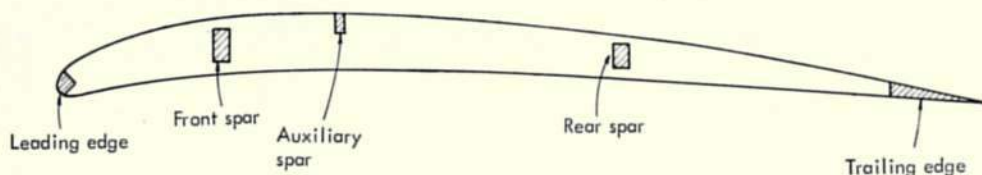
TYPICAL WING SECTION 1914 - 18 AEROPLANE
